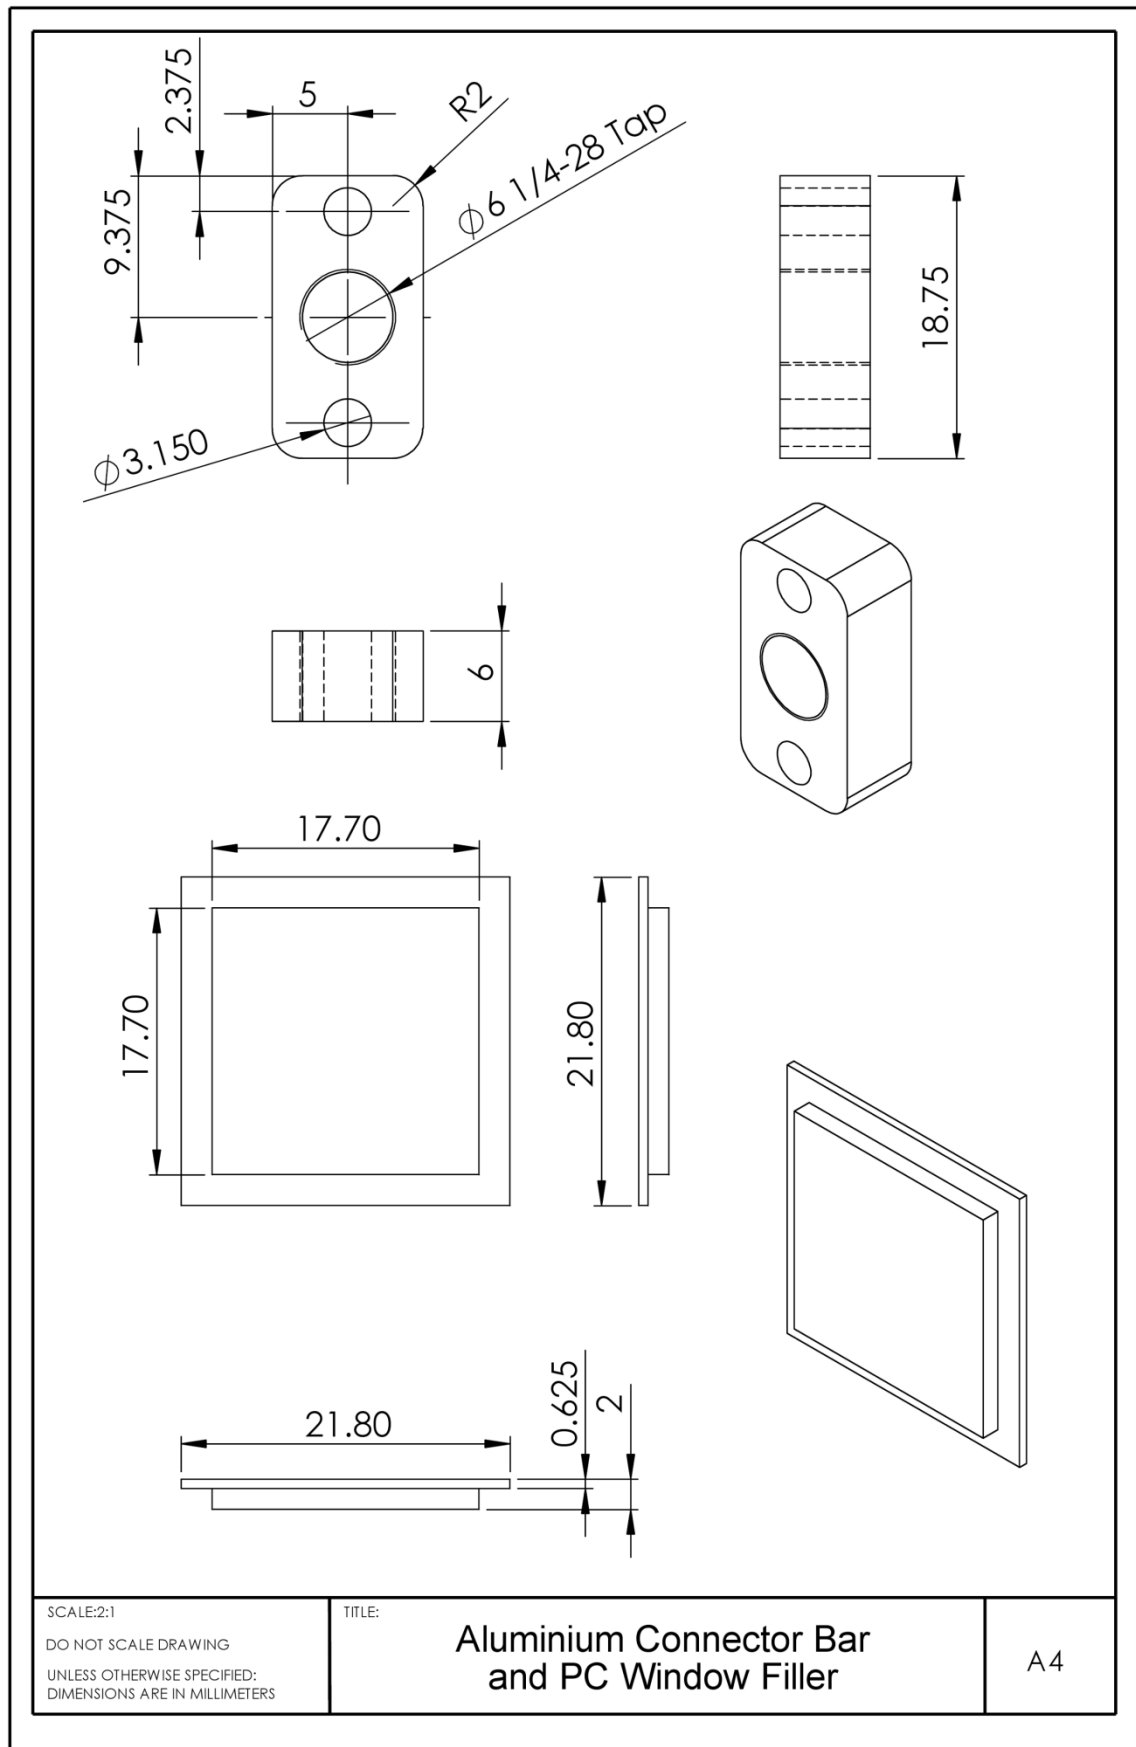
Technical drawings of aluminium connector bar & polycarbonate window filler.
